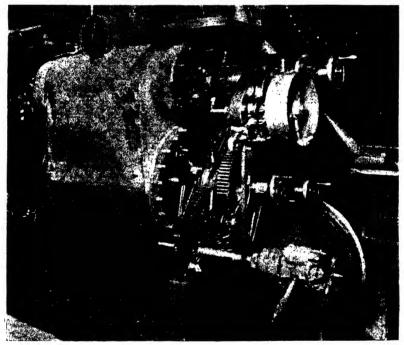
Another portable boring rig at work on both cylinder and valve chamber.
